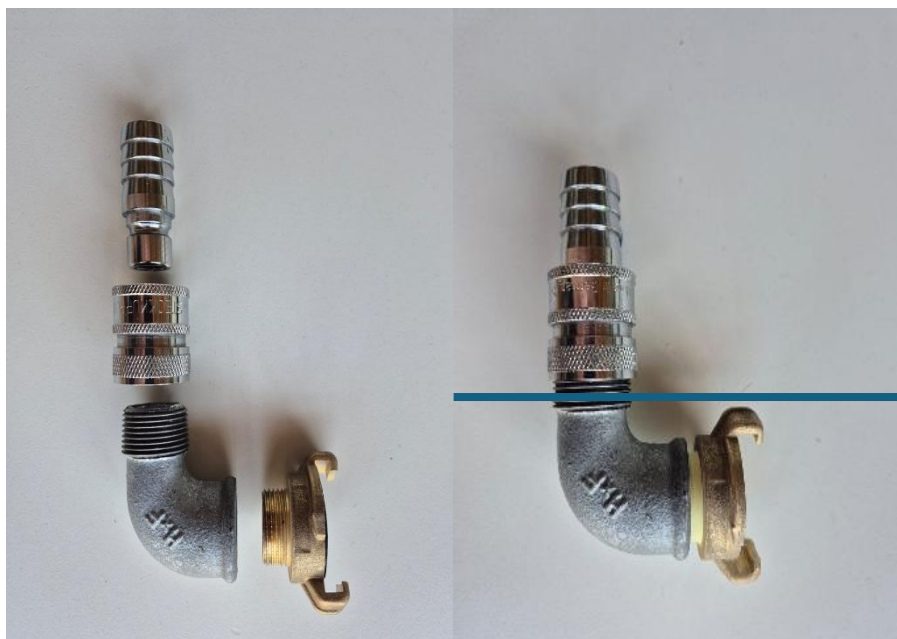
Exploded (left) and assembled (right) view of the transition from rotating to stationary hose (Own photographs)
